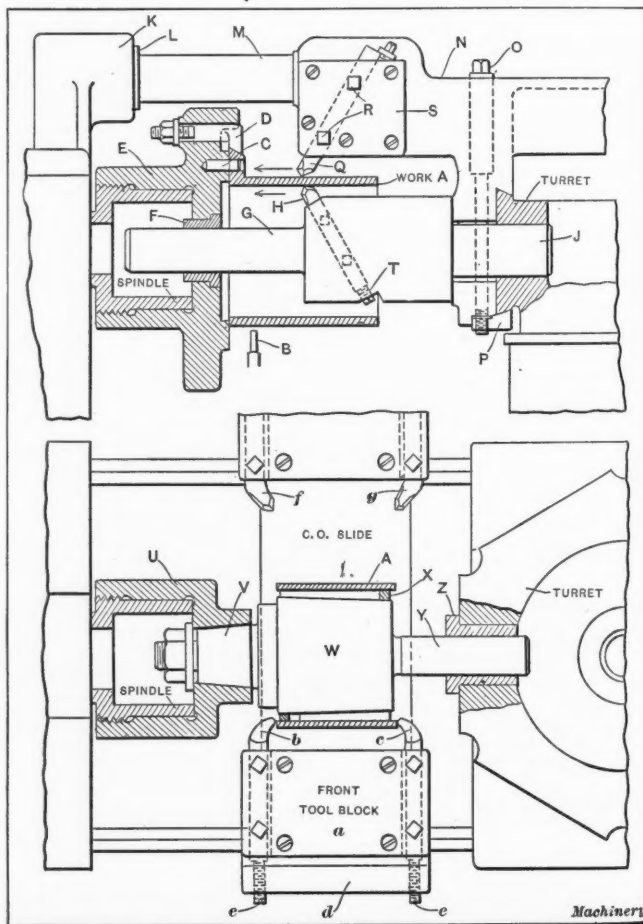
Machining a Sliding Sleeve in a Turret Lathe
